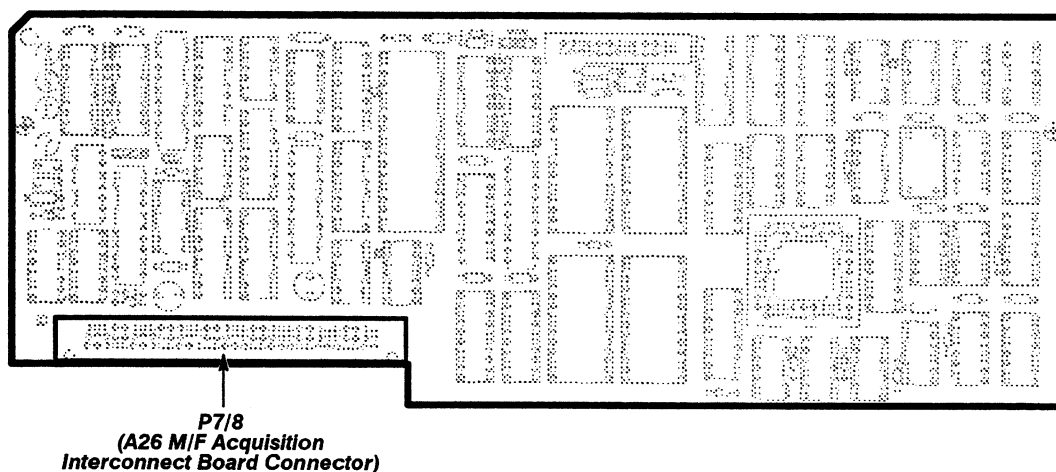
Removing and Replacing the A28 Acquisition MPU Board
